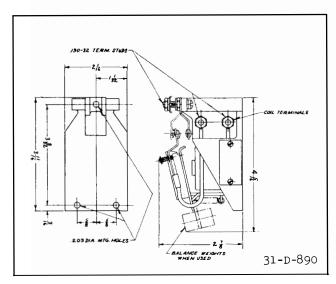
Outline and Drilling Plan for the Open Type SG Auxiliary Relay with Reversible Contacts. For Reference Only.
